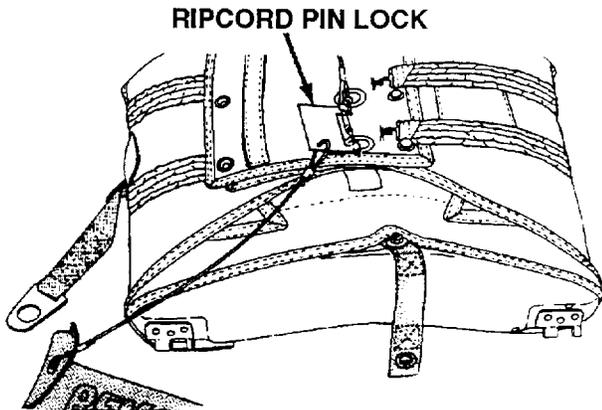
Insert Ripcord Pin Lock 6.2-7018
